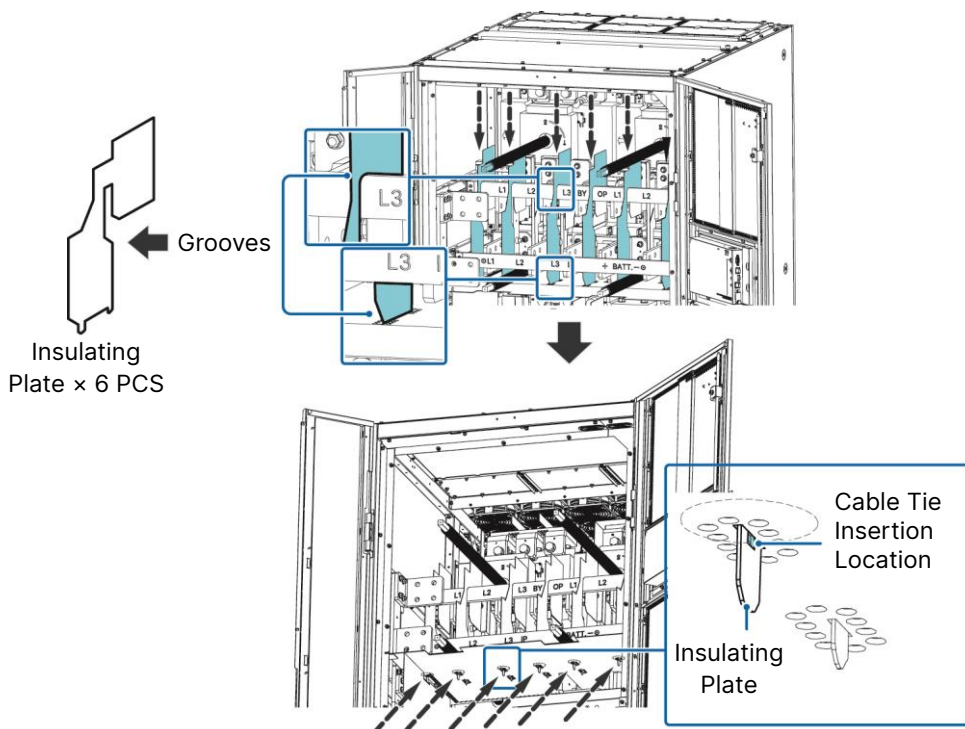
Install the Six Insulating Plates & Fix them with the Six Cable Ties
